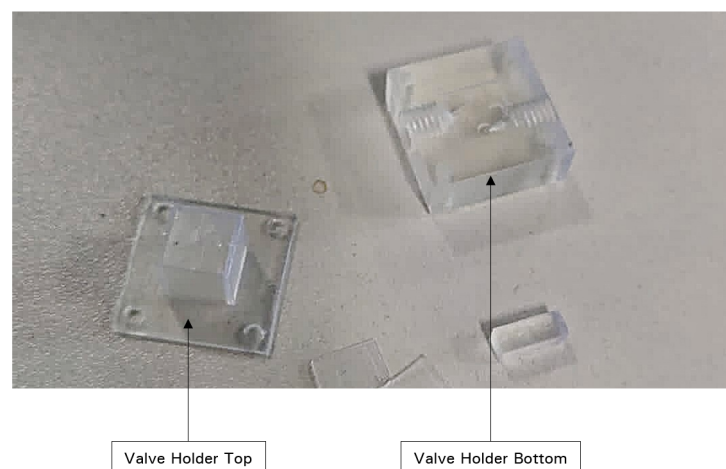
Prototype of Resin 3D printed valve housing based on the design presented in this study
